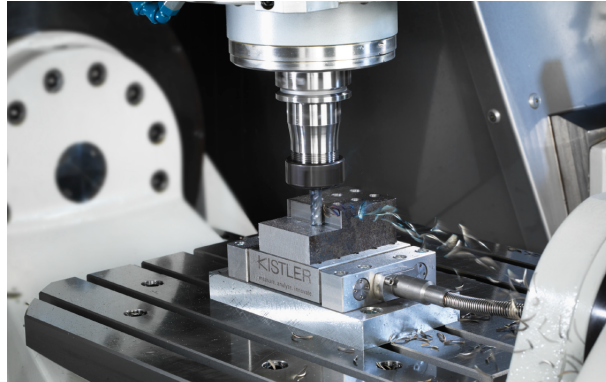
Fixed dynamometer (courtesy of Kistler)
